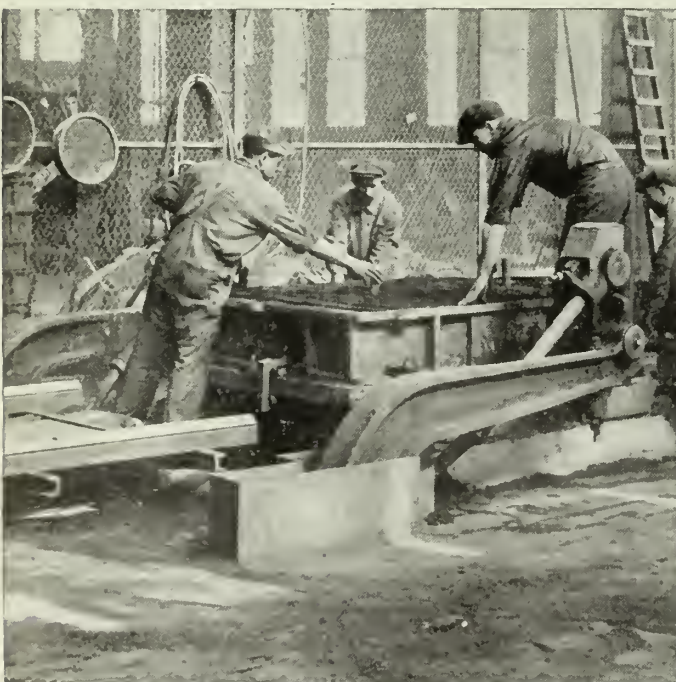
COPE BEING JARRED ON HERMAN PNEUMATIC MACHINE.
